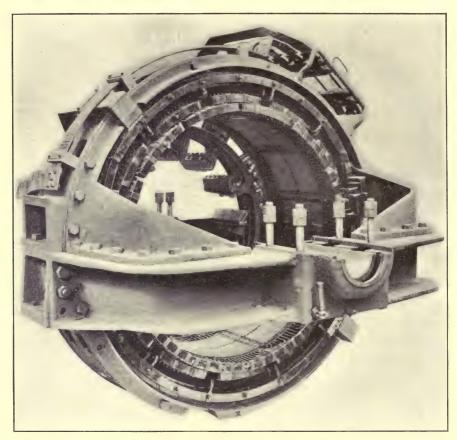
Bernese Alps Railroad. Oerlikon Locomotive. Motor with Armature Removed.
